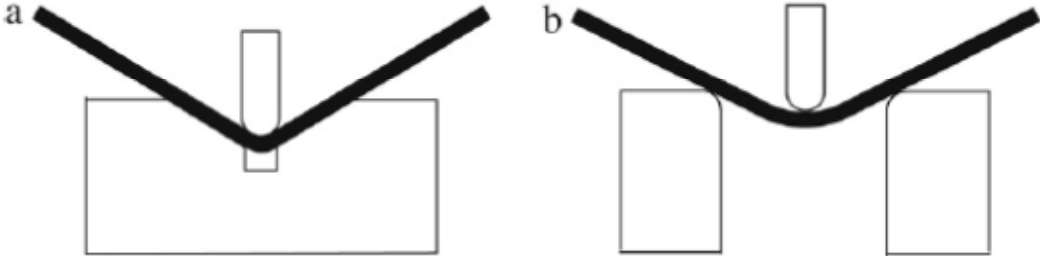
(a) V-bending and (b) Air Bending [12]
